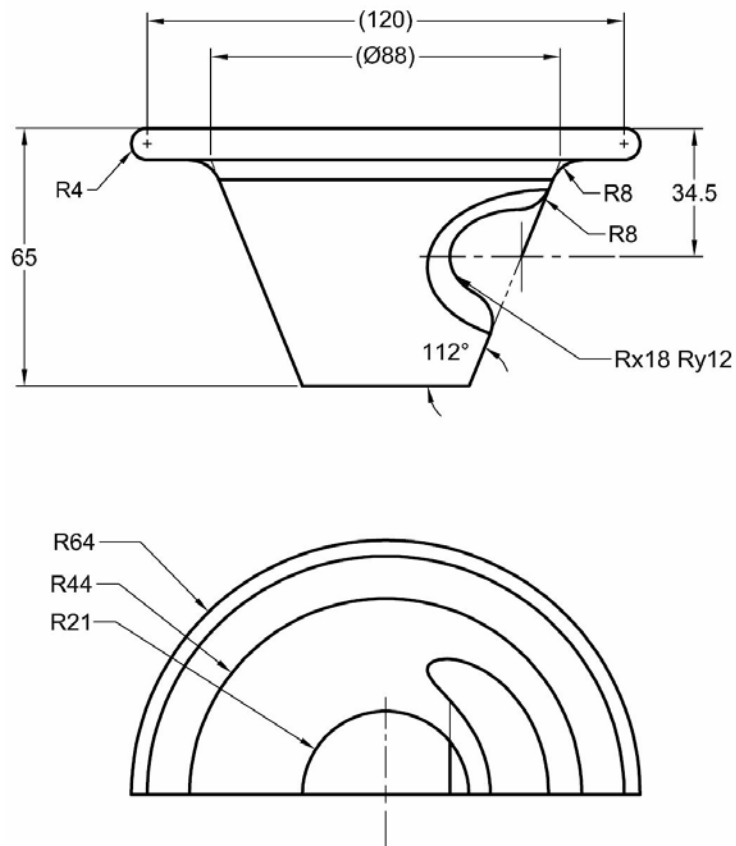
Drawing views and dimensions of the surface model for Exercise 1
